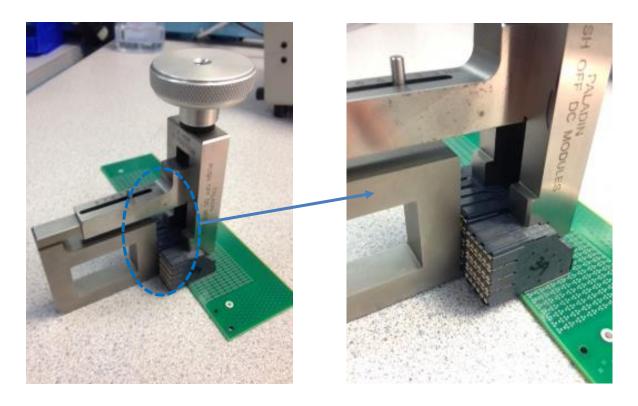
Paladin RAF Module Removal Tool with Push Body Attachment
